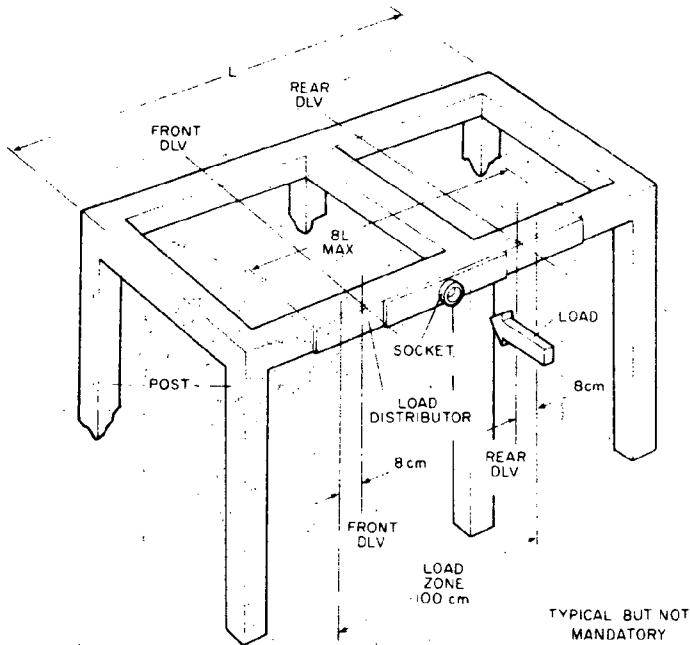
LOAD DISTRIBUTOR AND SOCKET ARE TO PREVENT LOCAL PENETRATION AND TO HOLD END OF LOAD GENERATING DEVICE
